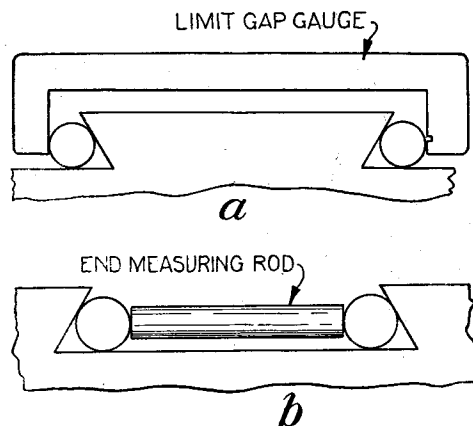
Gauging with separate rollers (a) checking a male slide by a limit gap gauge (b) checking a female slide by end measuring rods.
